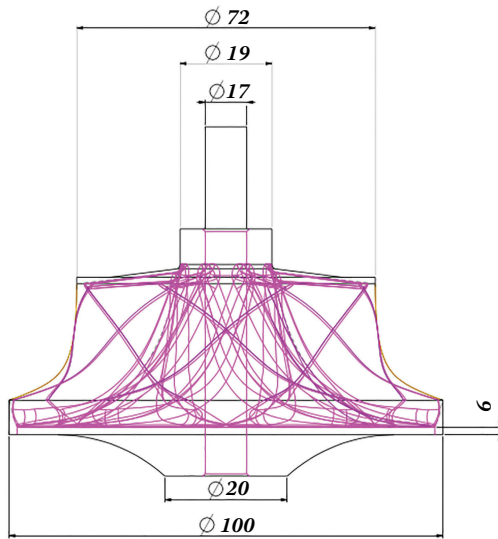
Drawing of compressor wheel casting (dimensions in mm)
